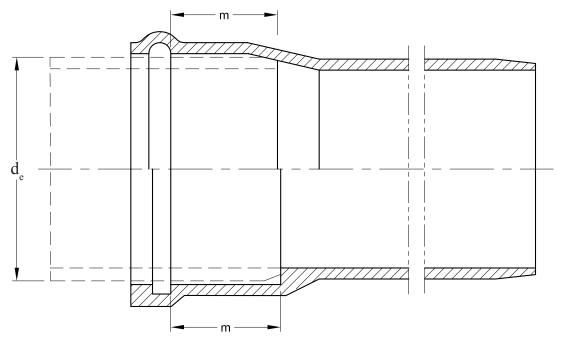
MINIMUM DEPTH OF ENGAGEMENT
